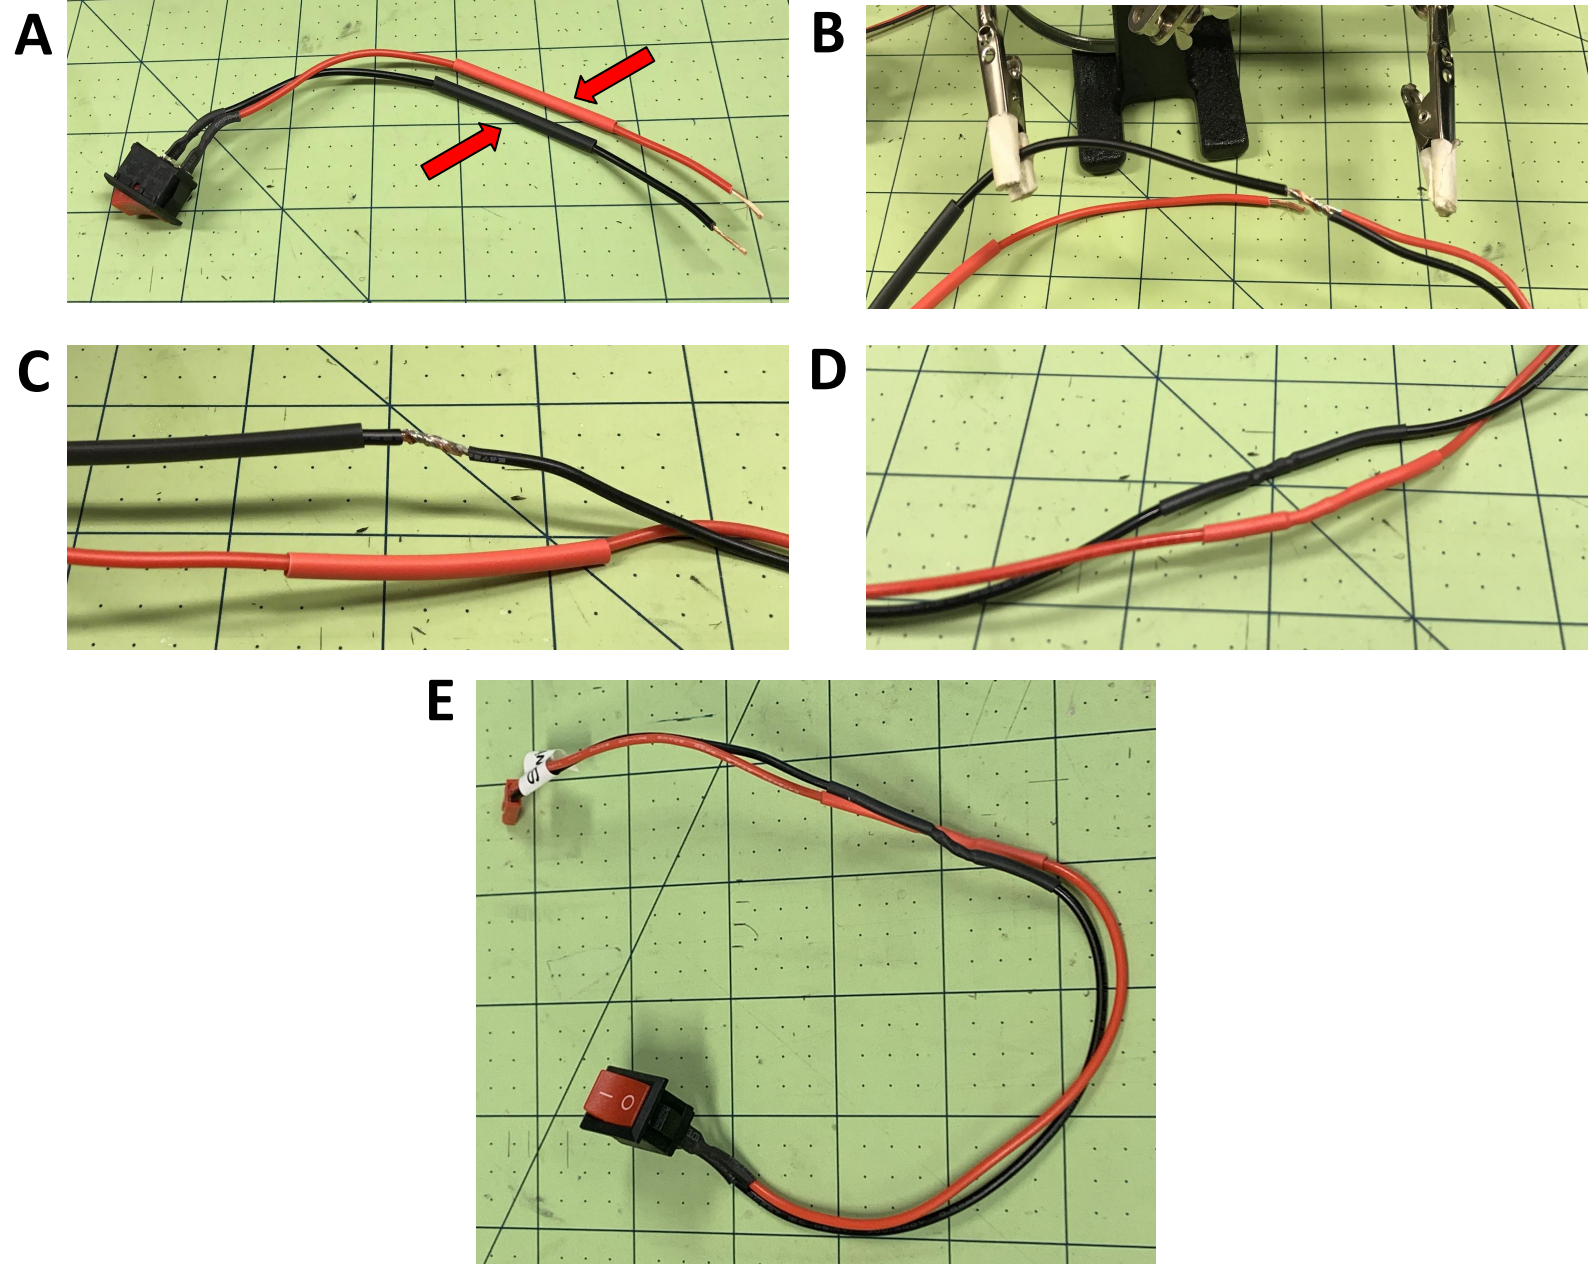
Soldering the power switch to a male wire-to-wire connector. (A) Power switch with stripped wires and shrink tube placed over the wires (red arrows). (B) Wires connecting the switch and male wire-to-wire connector twisted together before soldering. (C) Placing the shrink tube over the soldered connections. (D) Connections covered with the heat treated shrink tube. (E) A powerswitch assembled with a male wire-to-wire connector.
